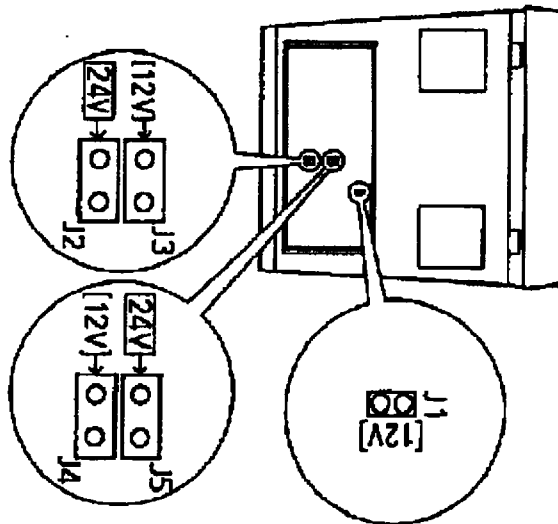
Display unit, left side view, showing location of jumper wires on the POWER board
